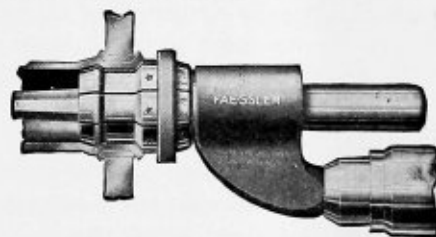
HAMMER APPLIED TO EXTRACT THE MANDREL
